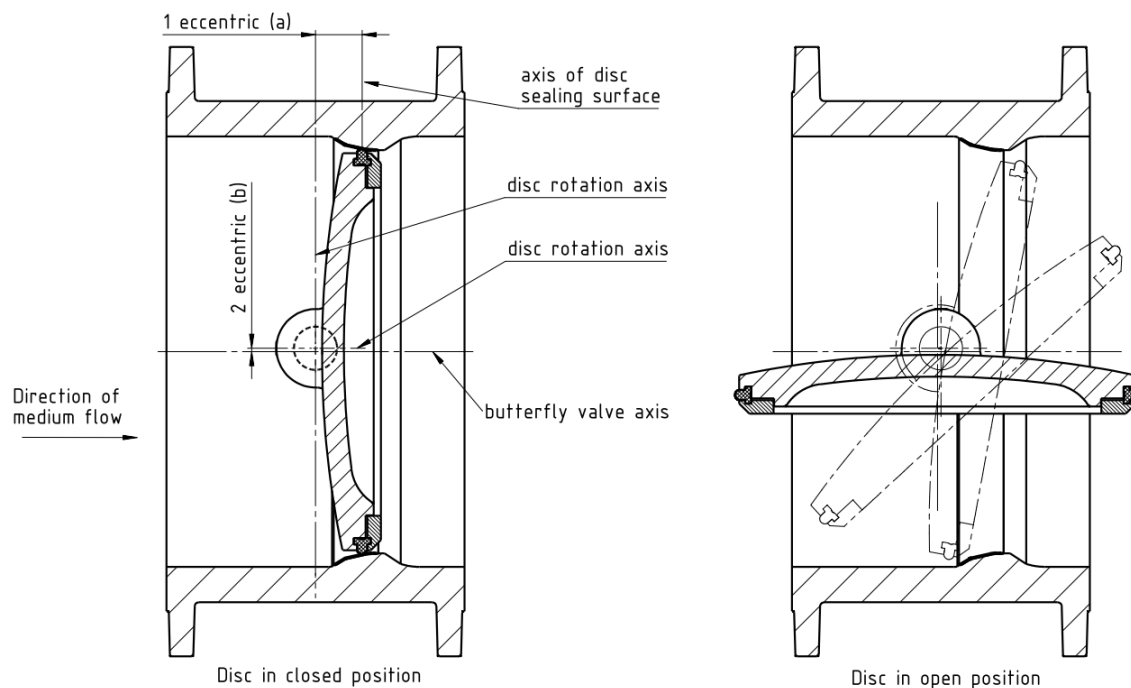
Disk positions depending on the butterfly valve opening angle.
